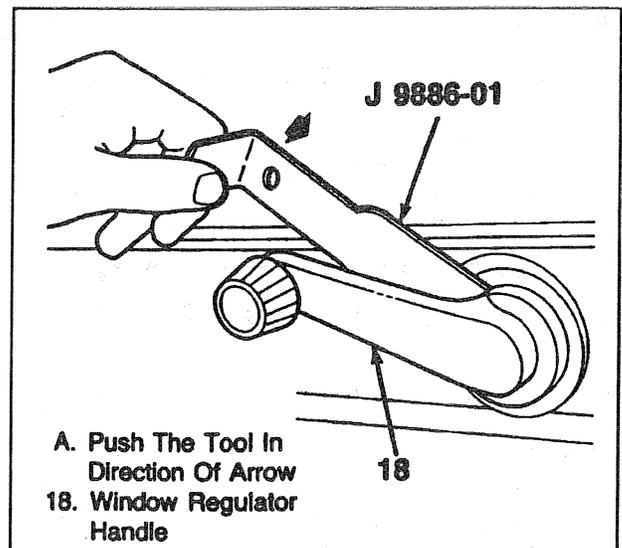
Typical Window Regulator Handle Retaining Clip Removal
